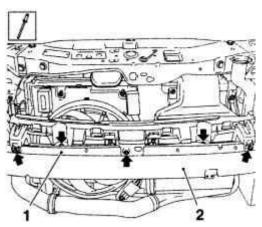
Concealed rivets (indicated by arrows) front mounting rail to the front bumper beam: 1 - mount the front rail, 2 - front bumper
